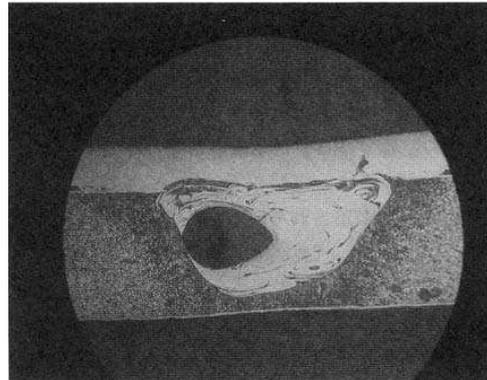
Cross sectional photo of usual resistance weld (Nickel (0.15 mm) × nickel-plated iron (0.35 mm thick)).
